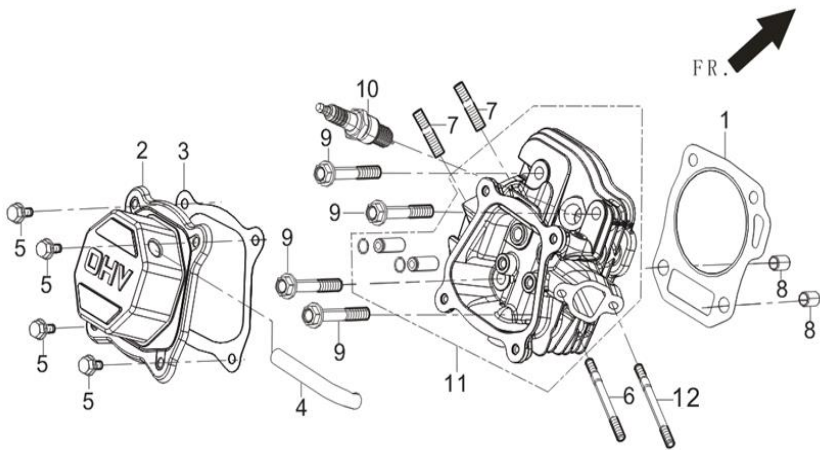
HEAD SUBASSEMBLY, CYLINDER / PLUG,SPARK(E04)
